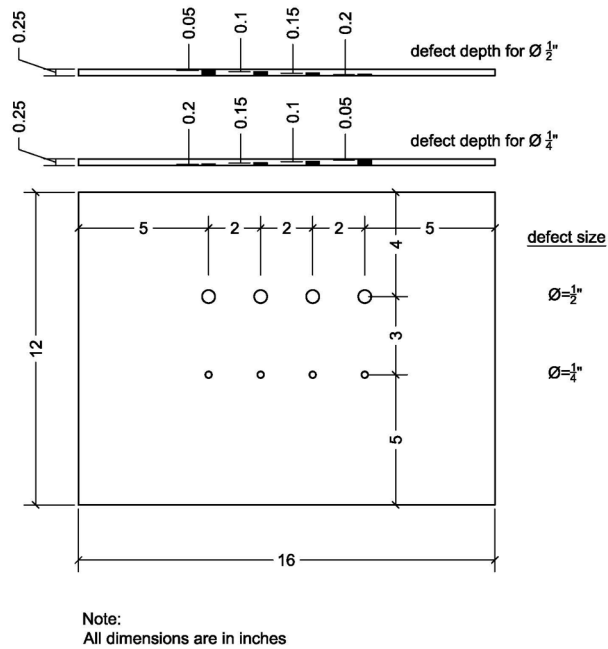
Specimen III design drawing showing type and location of defects in the weld.
